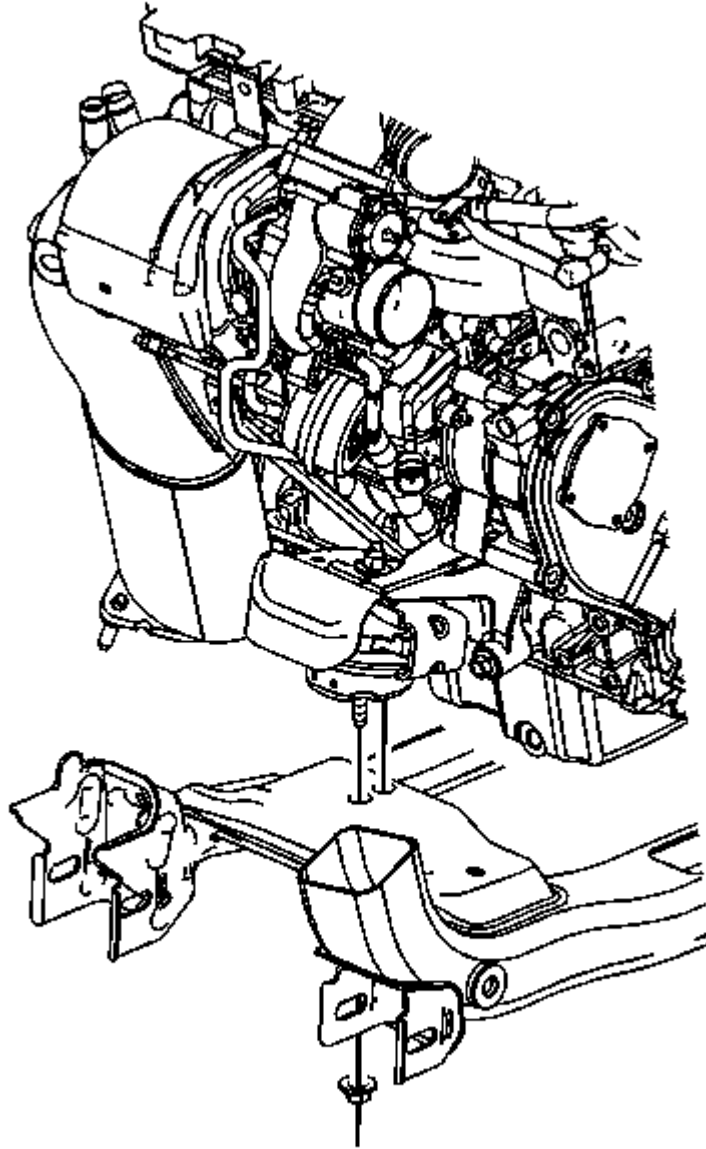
View Of Passenger Side Engine Mount-To-Frame Lower Nut
